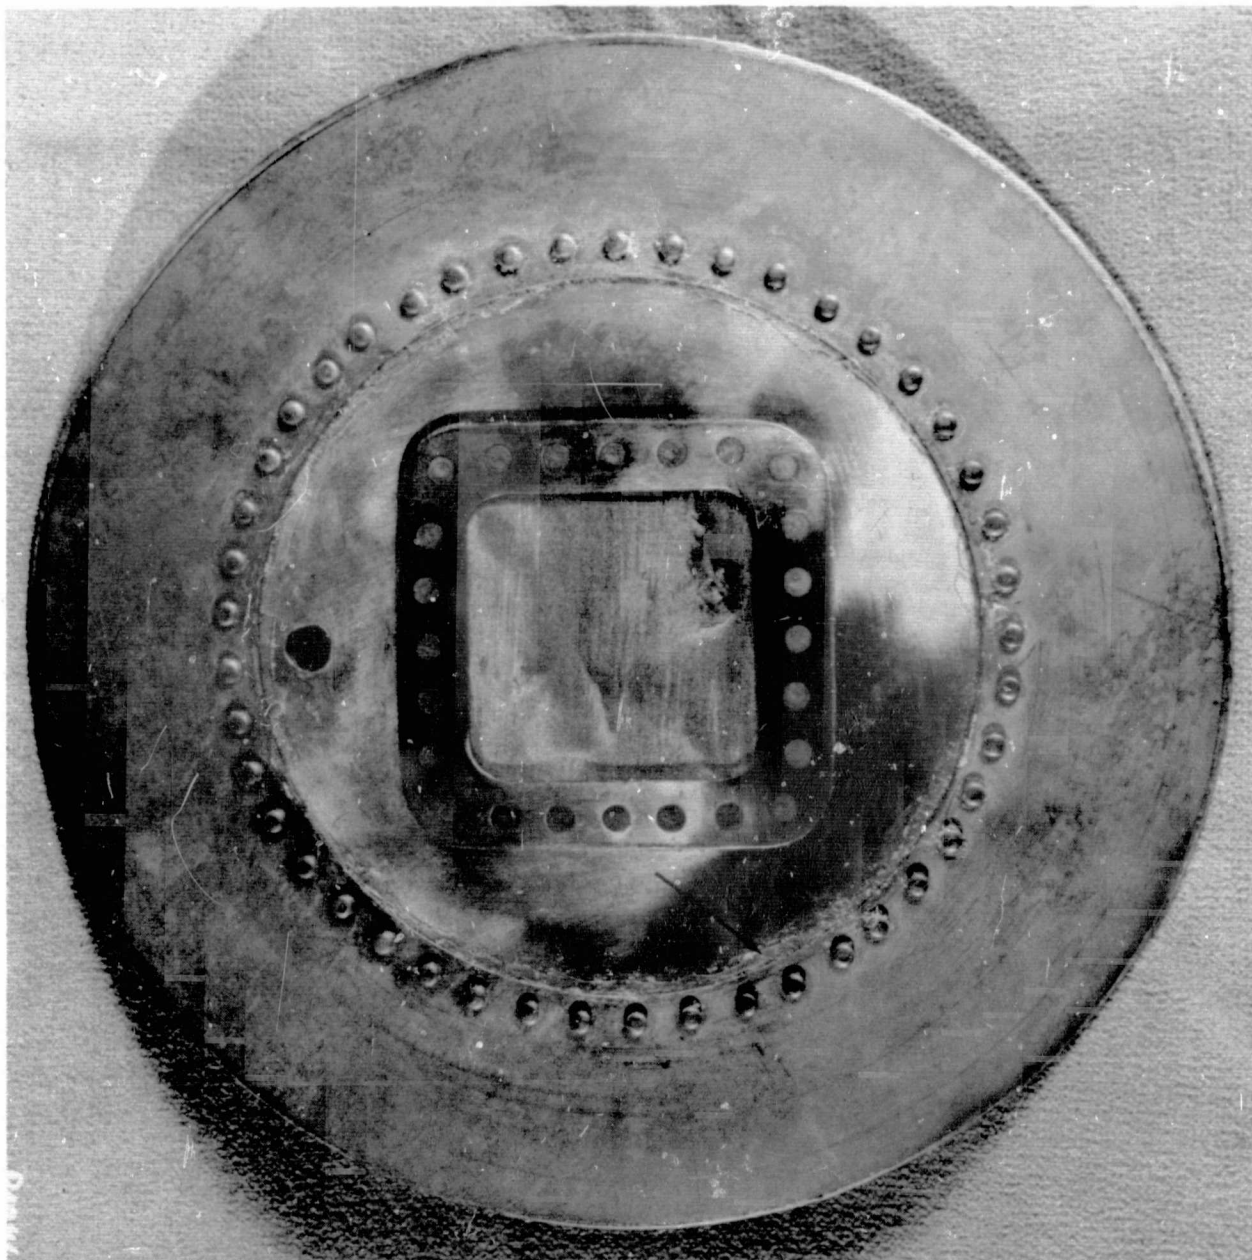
Fuel Trap Assembly Showing Water Glass Seal After Test
